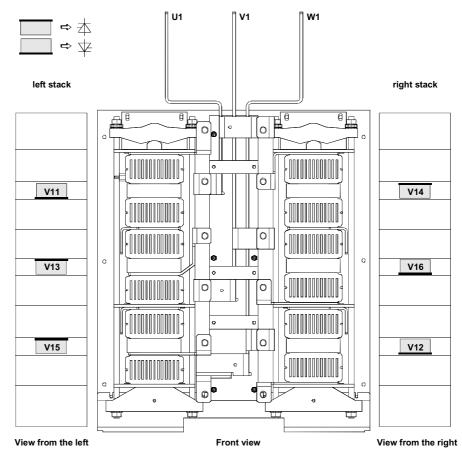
Location of thyristors in frame A5 (2-Q bridge)
